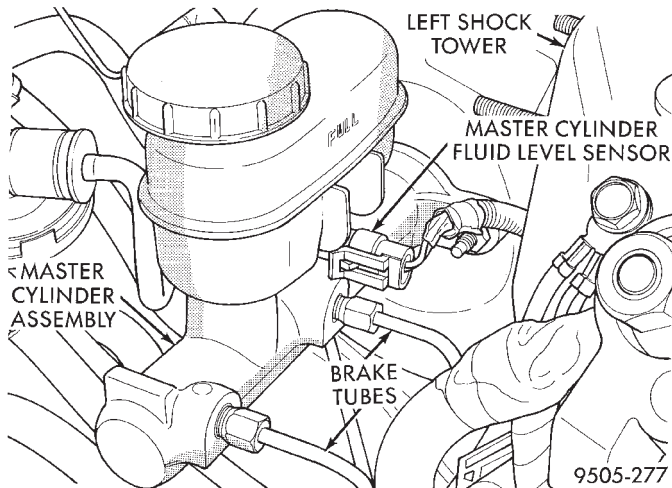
Master Cylinder Brake Fluid Level Sensor
